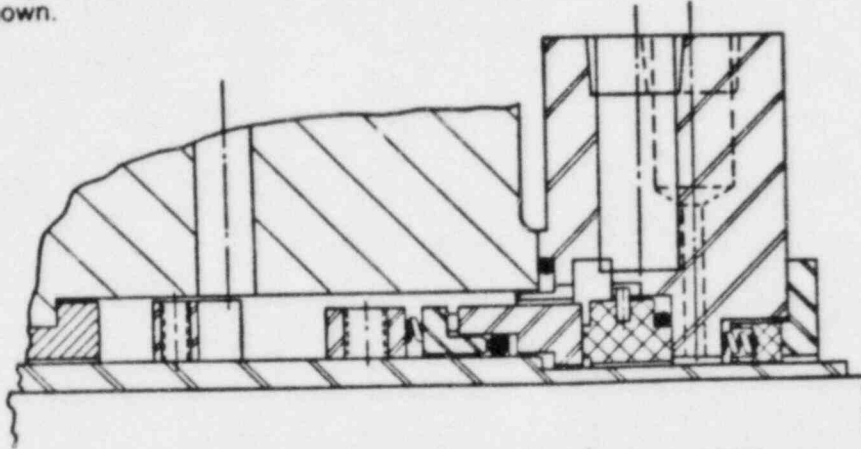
TYPE "HPTO" DURA SEAL W/ CIRCULATING RING & FLOATING THROTTLE BUSHING.
